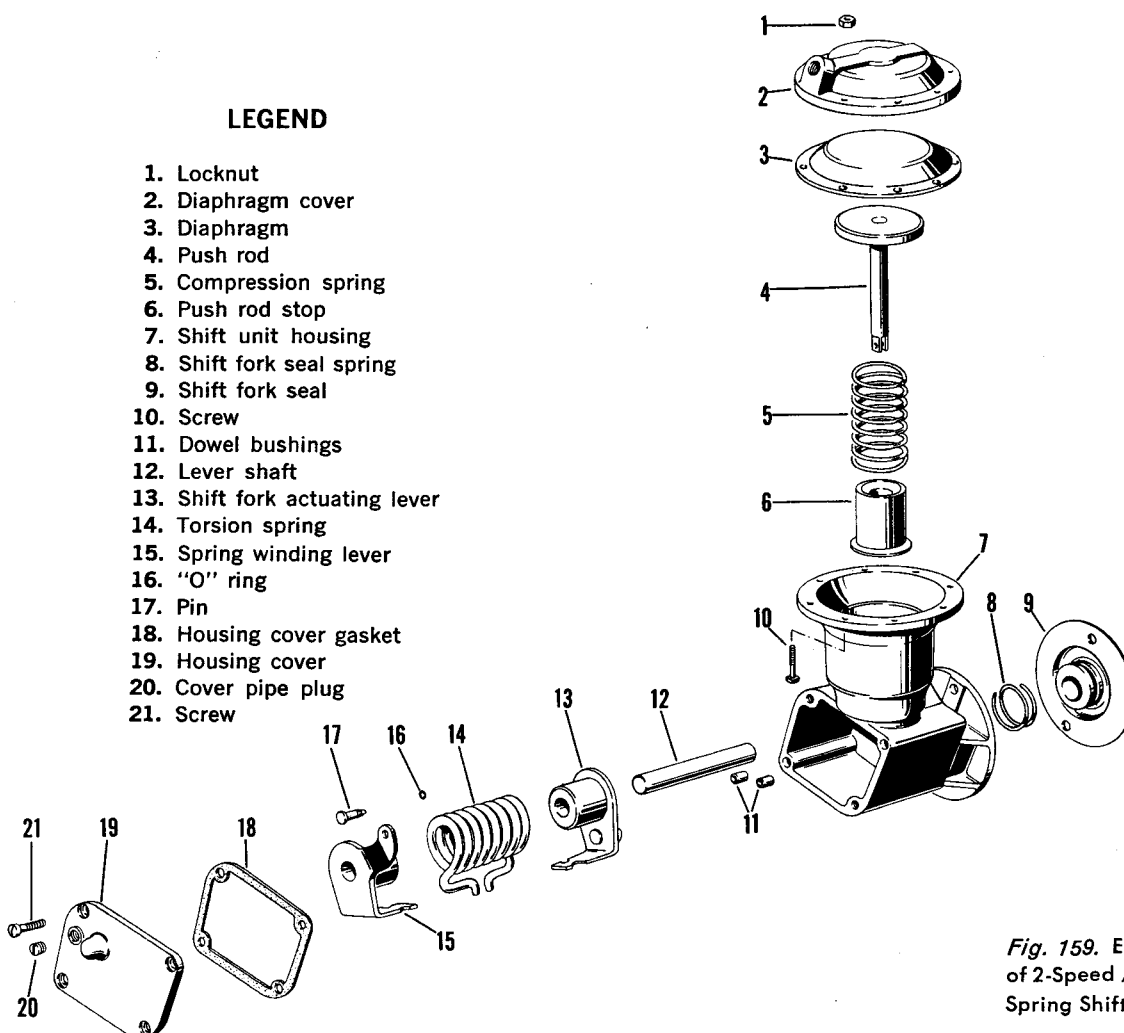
Exploded View of 2-Speed Air-Torsion Spring Shift Unit
